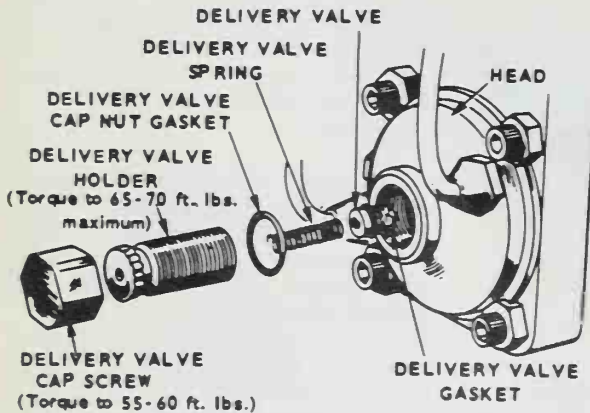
Exploded view of delivery valve assembly of PSU injection pump. Note that only delivery valve spring is removed when using Method II to time two and four cylinder engines. See text for procedure.
